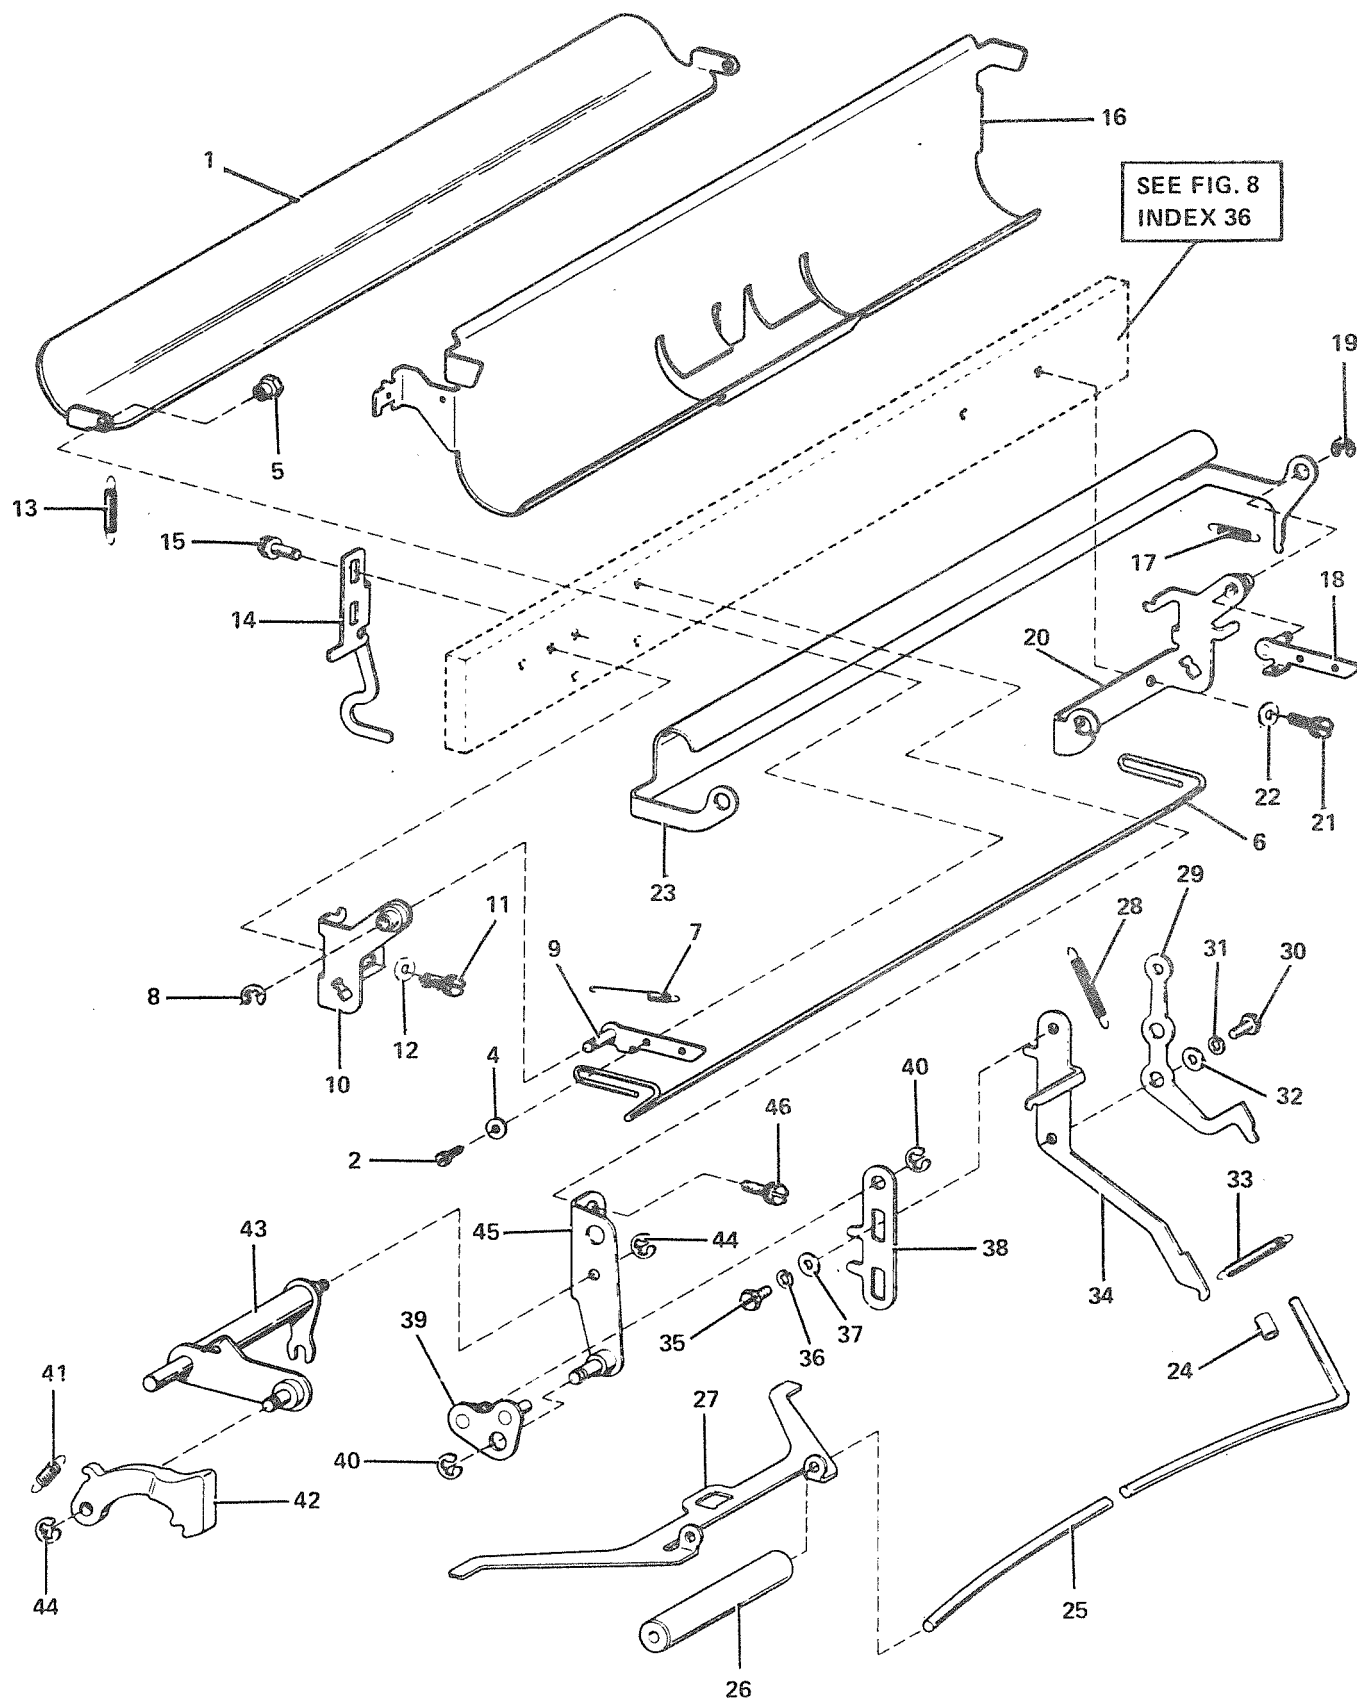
PRINTER- PAPER HANDLING MECHANISM. SEE LIST 9.
